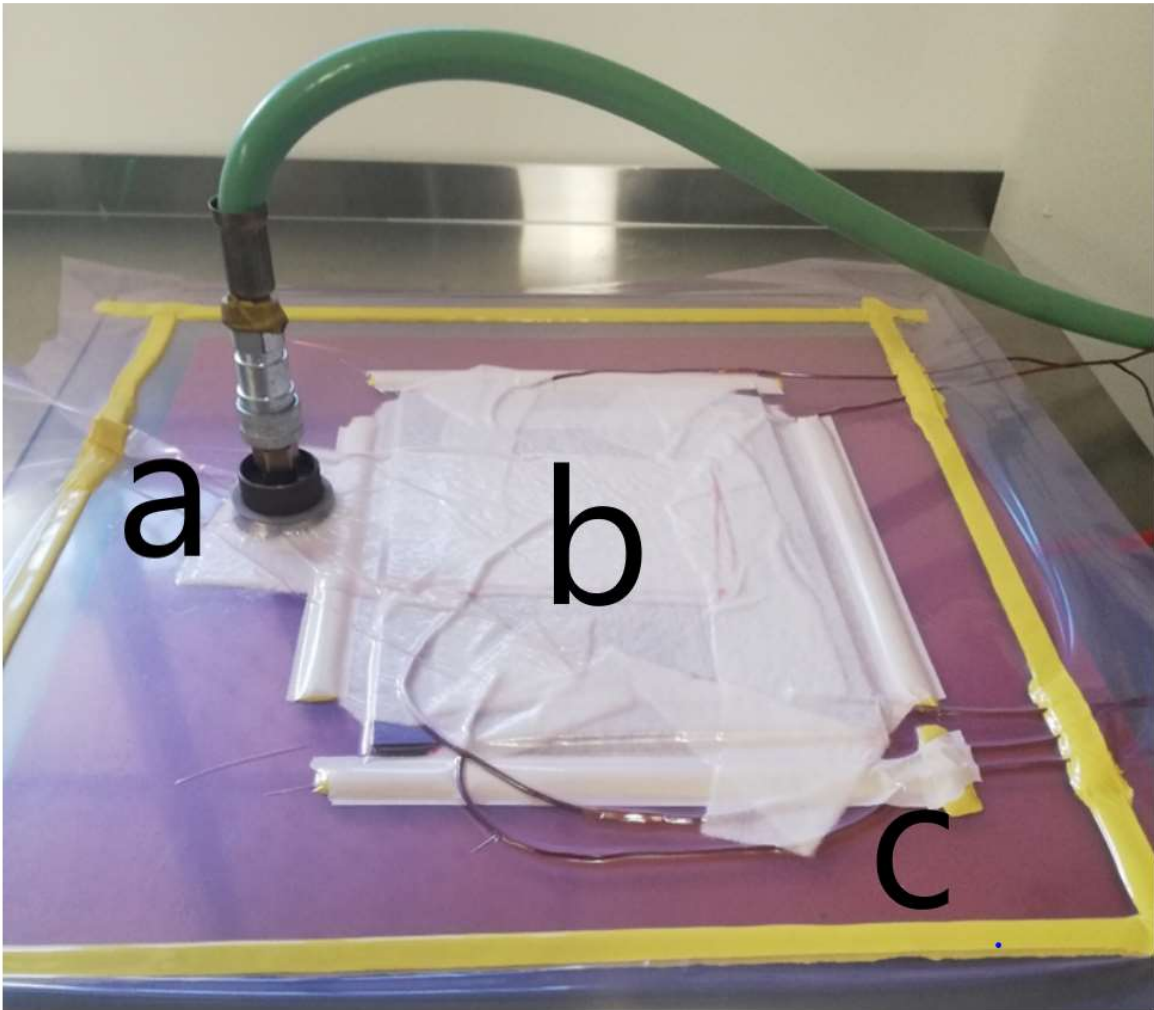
SVB specimen, with all required components, including a) vacuum port; b) breather cloth; and c) sealant tape.
